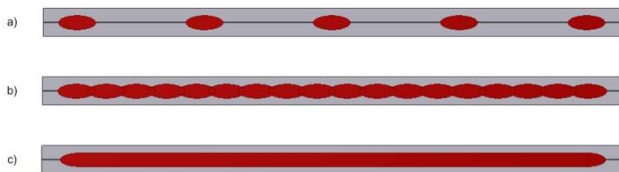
Seam Weld Types. a) Roll spot b) Overlap spot c) Continuous seam
